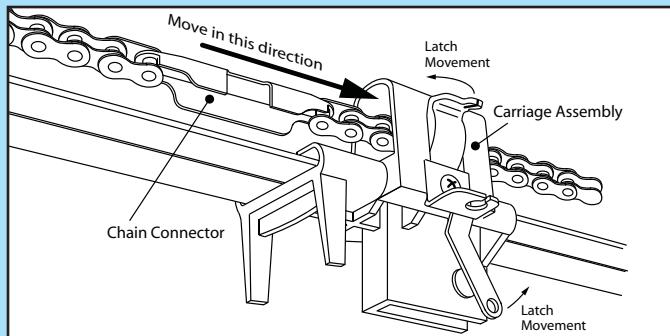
Engage Chain/Belt Connector to Carriage.
